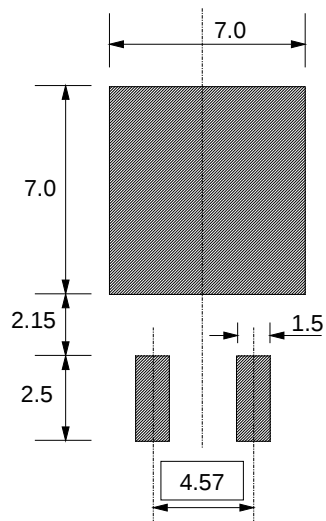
SOT428 : minimum pad sizes for surface mounting.
